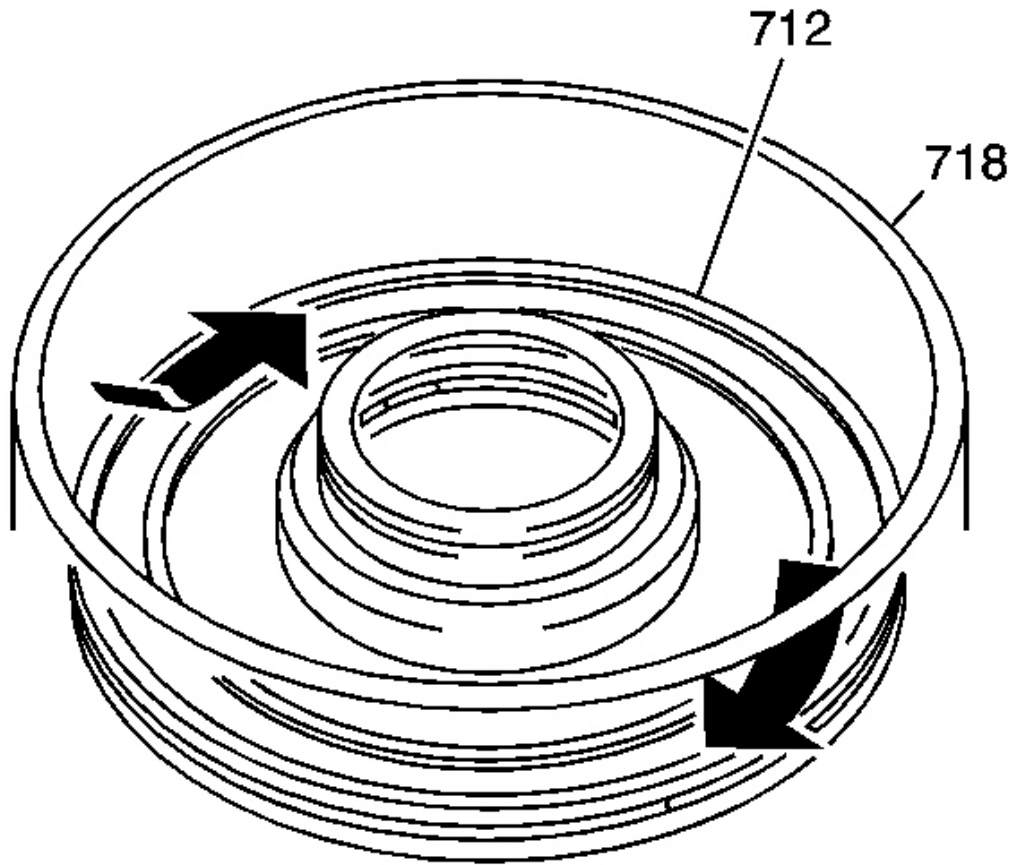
Installing The Coast Clutch Piston Into The 1st & Coast Clutch Housing
